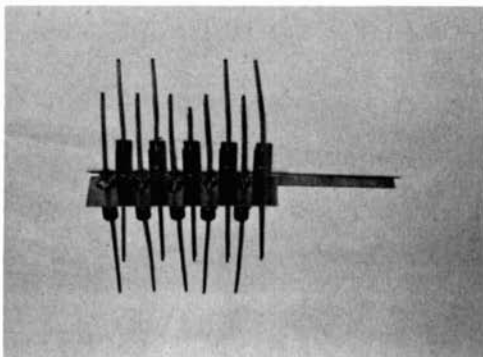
First, solder the resistors to the center strip. This center strip is then mounted in the U-shaped box as shown in fig. 5.
